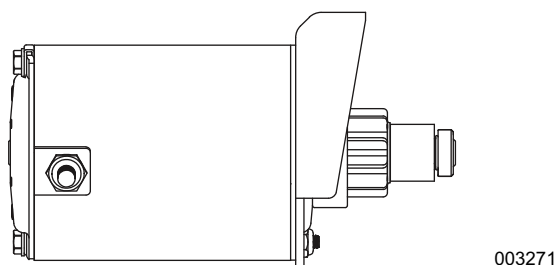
Starter Motor (410cc Single Cylinder Engine Units Only)
